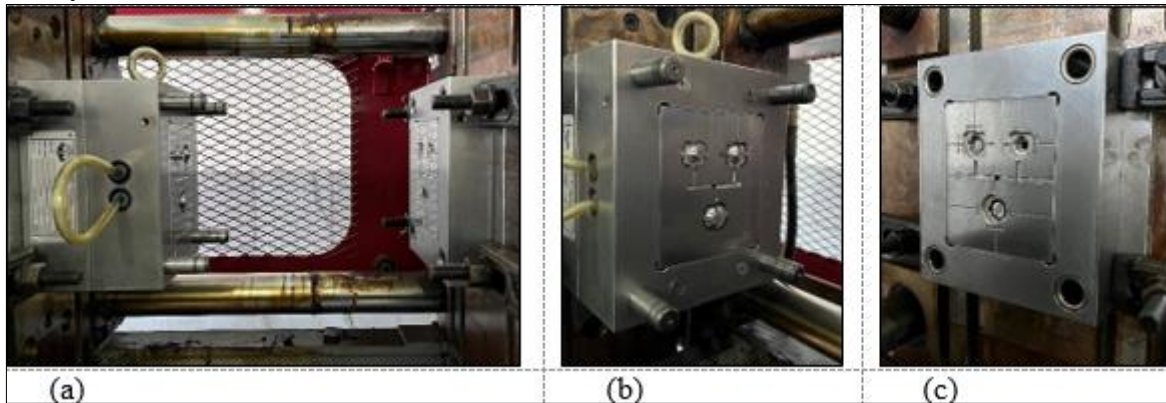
Lensknob mold: a) installed mold b) moving half c) fixed half
